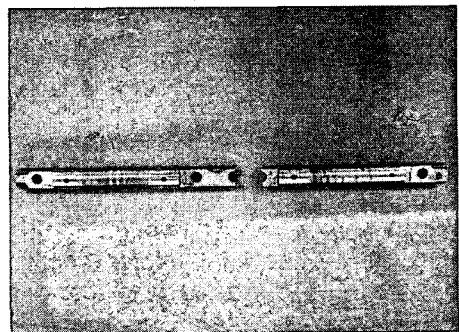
Failure of rocker arm shaft at 4-Cylinder SOHC engine
